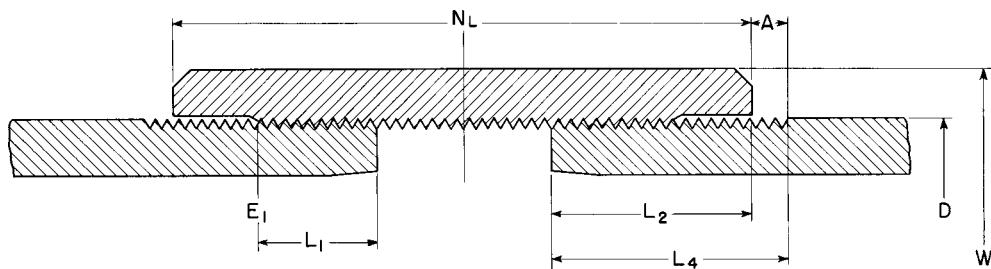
Recessed Taper-Tapped Coupling and Pipe (See Table 4 for Coupling Dimensions)
